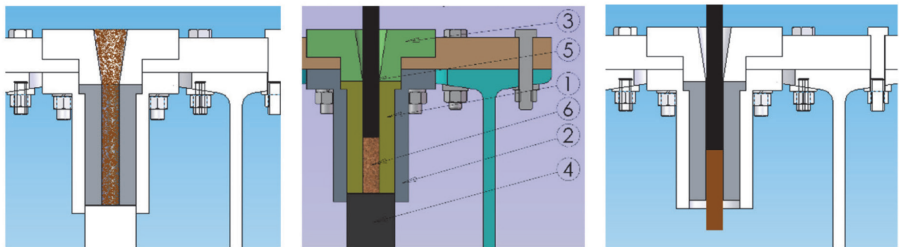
Cross-view of the experimental pressing device and pressing phases (1-pressing chamber, 2-pressing chamber flange, 3-startup chamber, 4-counter pressure plug, 5-pressing piston, 6-pressed raw material).
